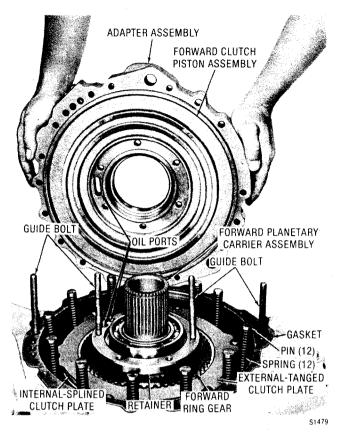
Installing rear housing adapter assembly (TRT-3 overdrive)
